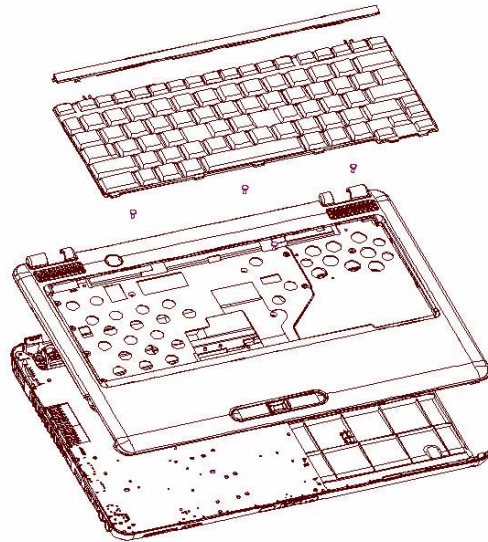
Disconnect the touch pad flat cable/Fingerprint cable/Bluetooth Cable
